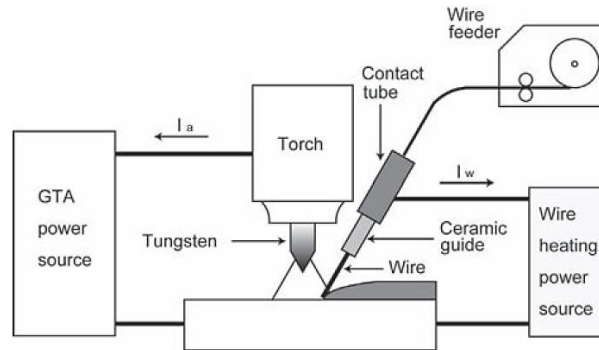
Conventional hot-wire assisted GTAW equipment setup [9].
